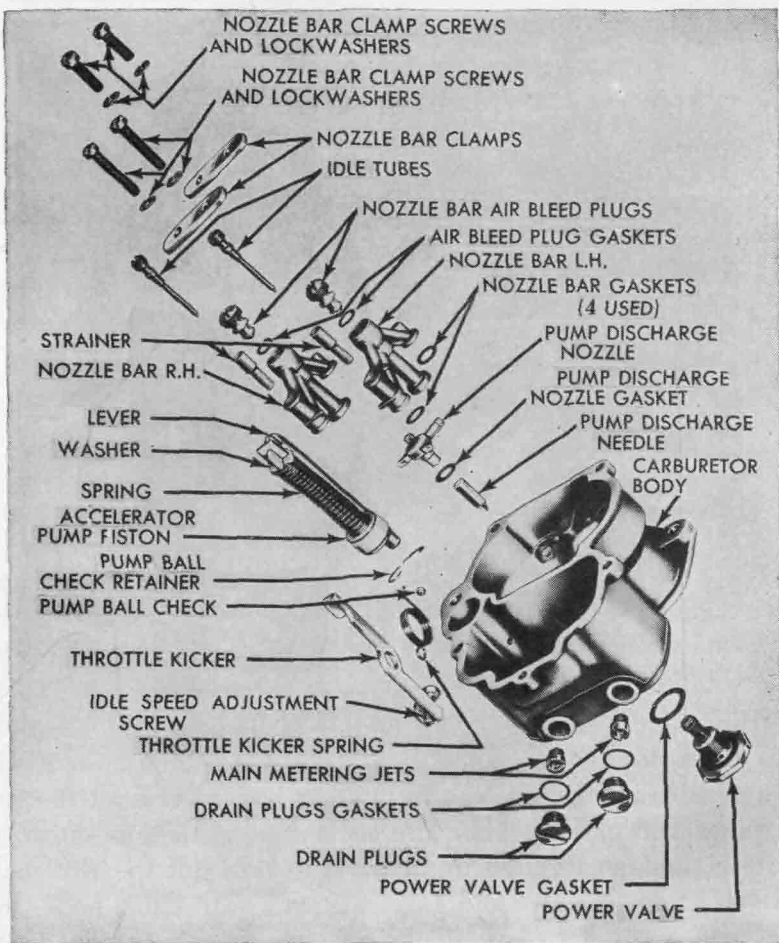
Main body of carburetor in disassembled view. (Ford Motor Company)
